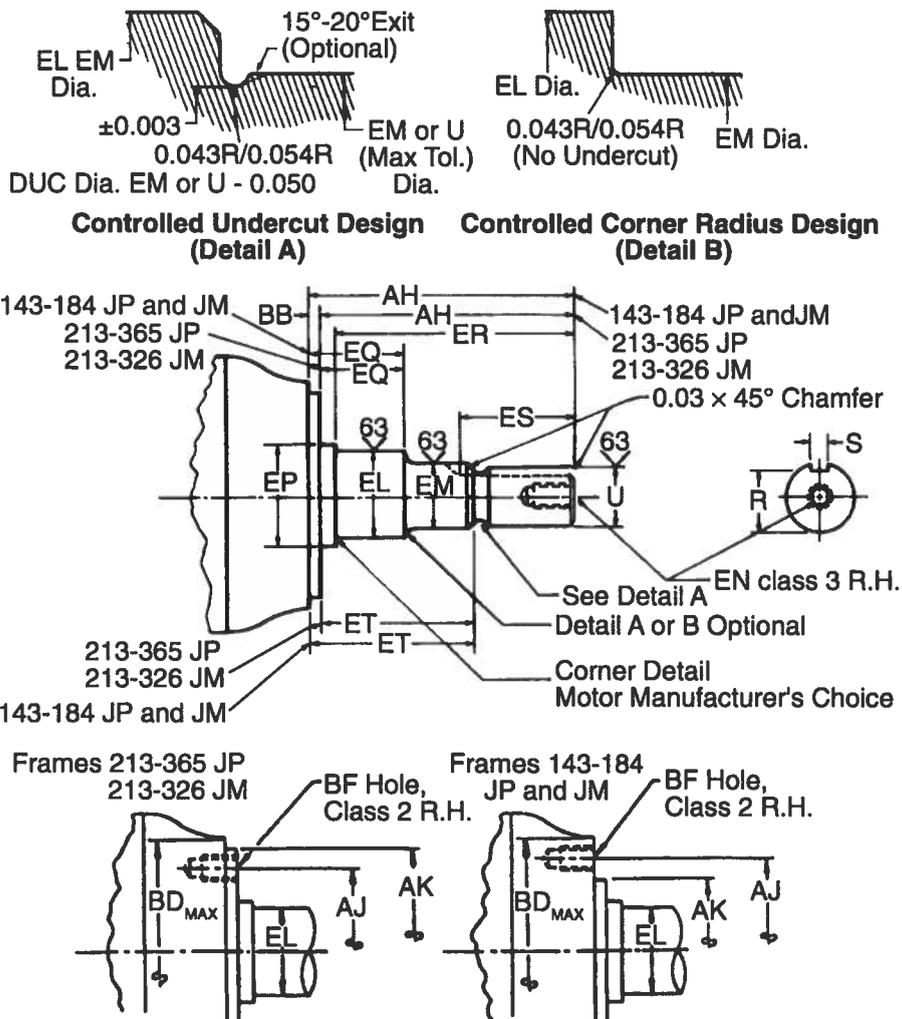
Dimensions for types JM and JP, alternating current, face-mounting, close-coupled pump motors having rolling element contact bearings. (This figure relates to Tables B.1 and B.2)
